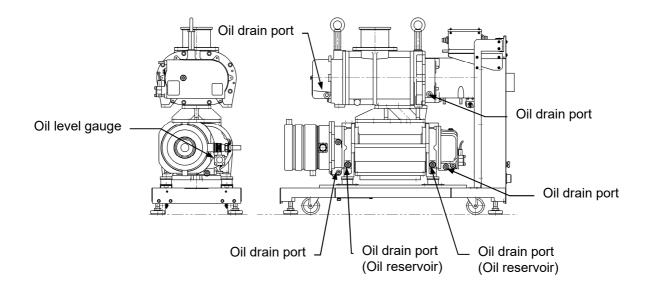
Oil filler inlet, oil level gauge, and oil drain port positions
